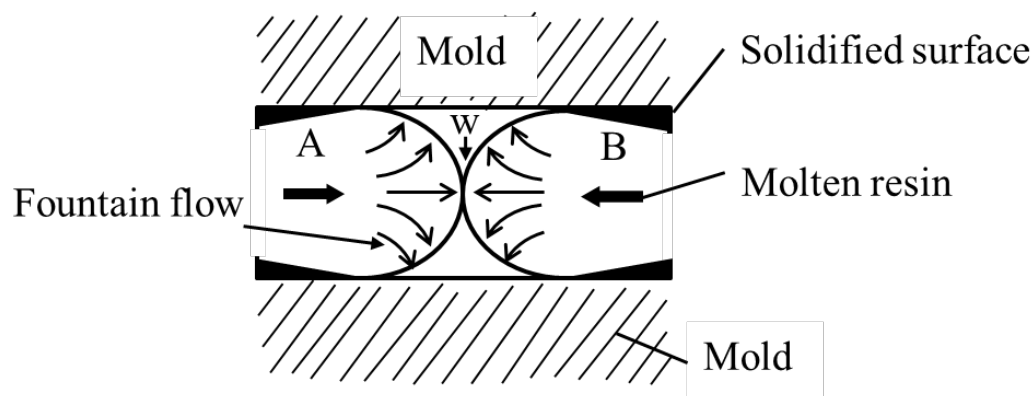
Weld line generation mechanism⁷⁰⁾
